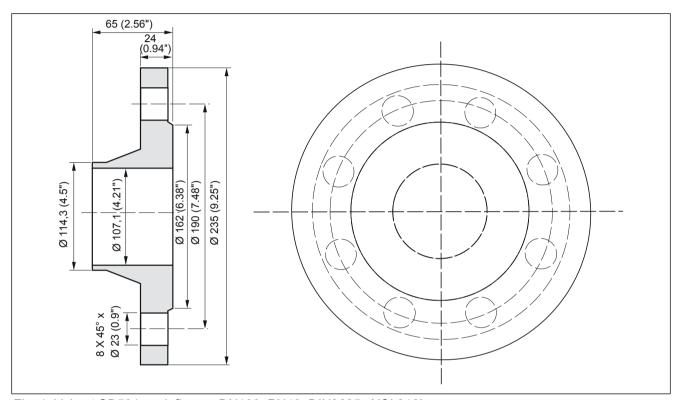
Valmet SD501 neck flange, DN100, PN40, DIN2635, AISI 316L.
